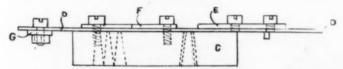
ELEVATION OF PUNCH HOLDER AND PUNCHES.
